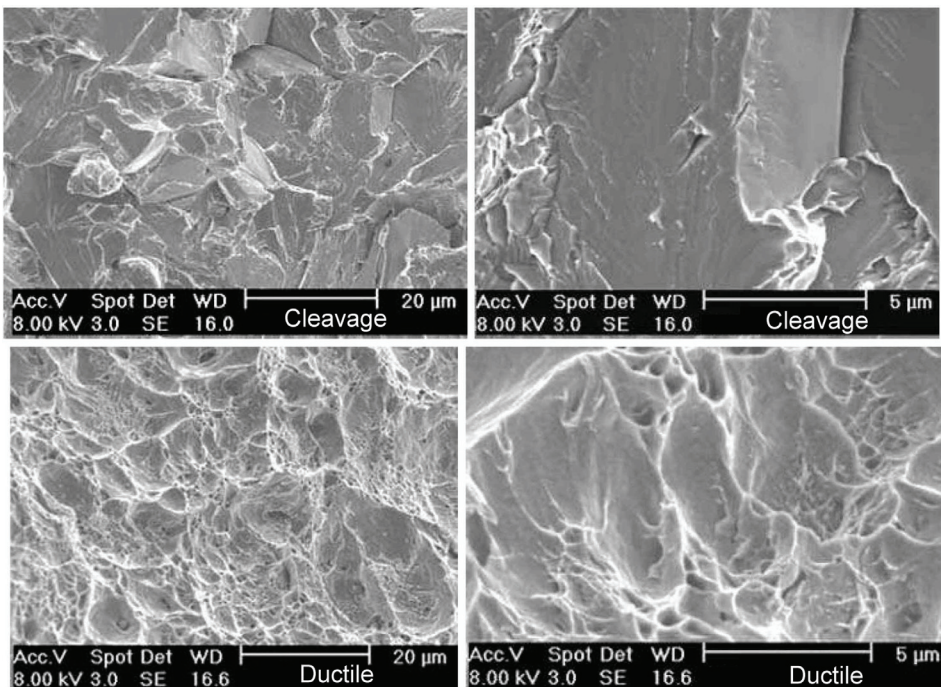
Fracture appearance (up fracture by cleavage; down by microvoid coalescence)
